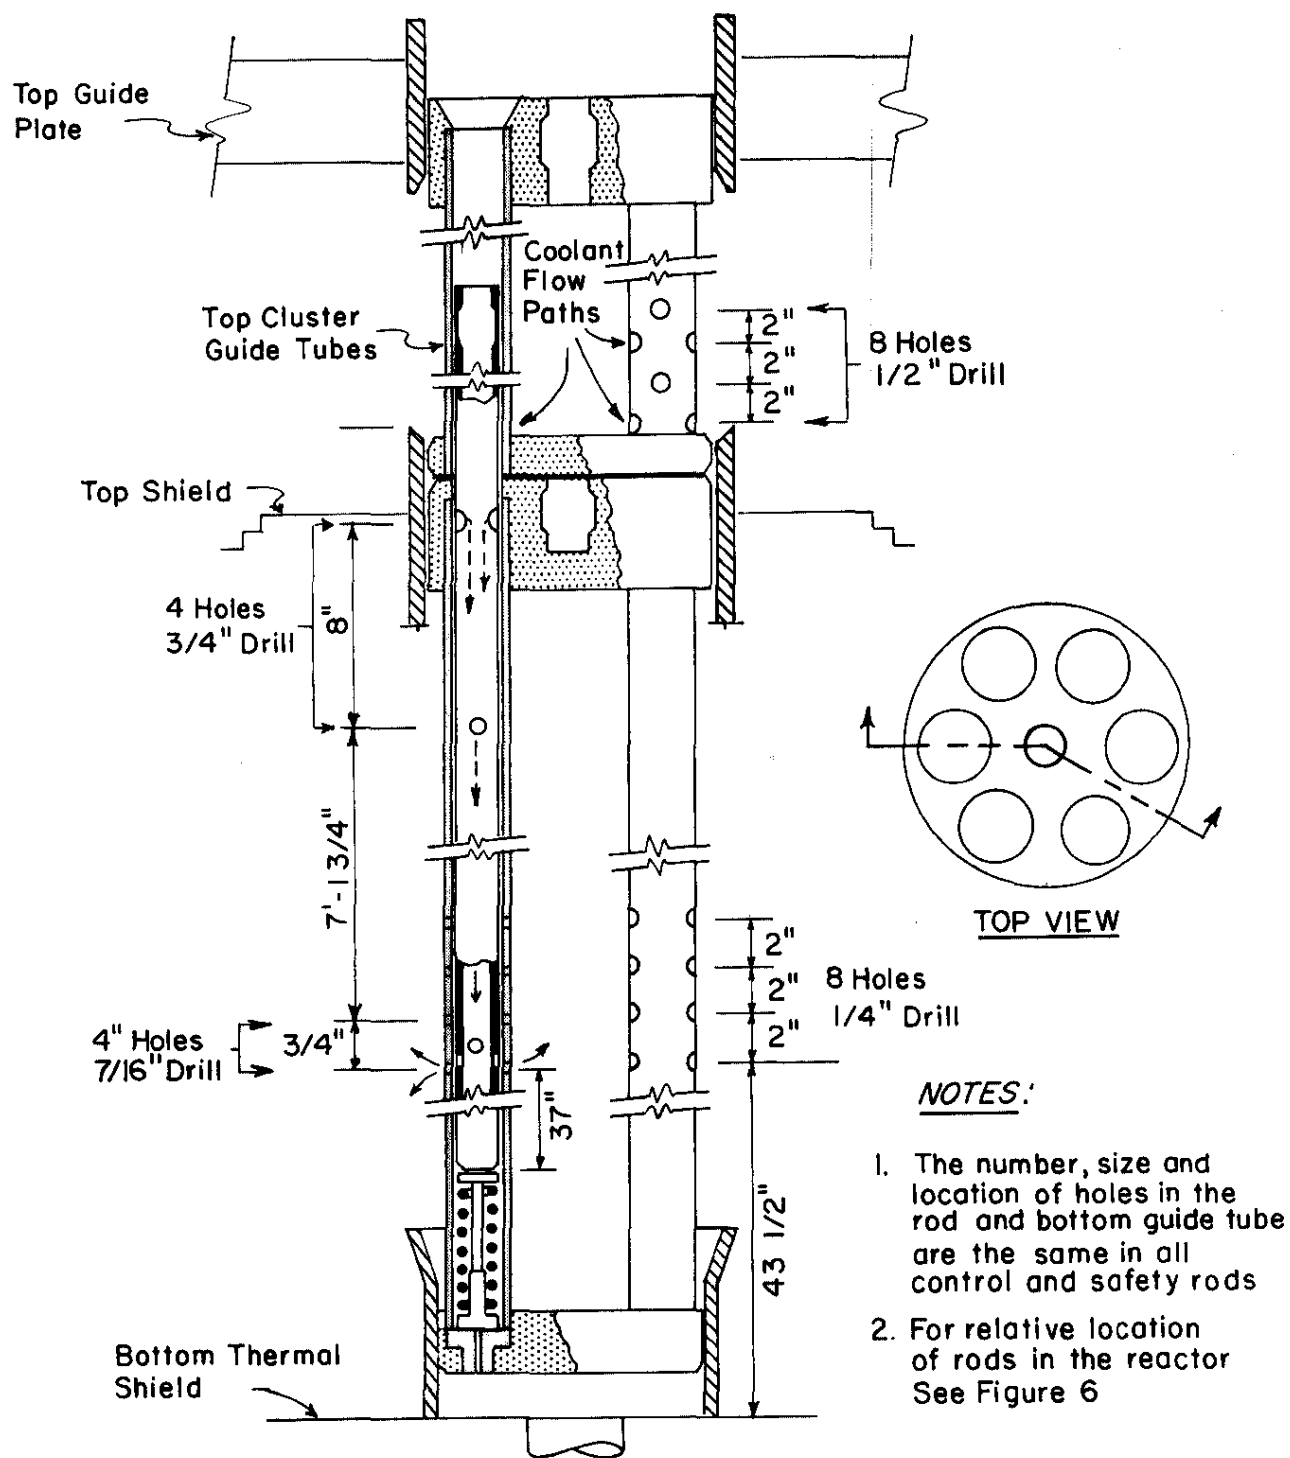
CLUSTER ROD GUIDE TUBE ARRANGEMENT
